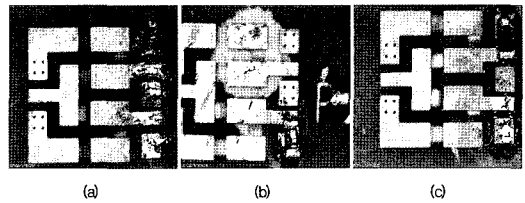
(a) 280°C baking for 80min (b) 288°C/10sec solder dipping w/o 190°C baking (c) 288°C/10 sec solder dipping after 190°C/2hr baking.
